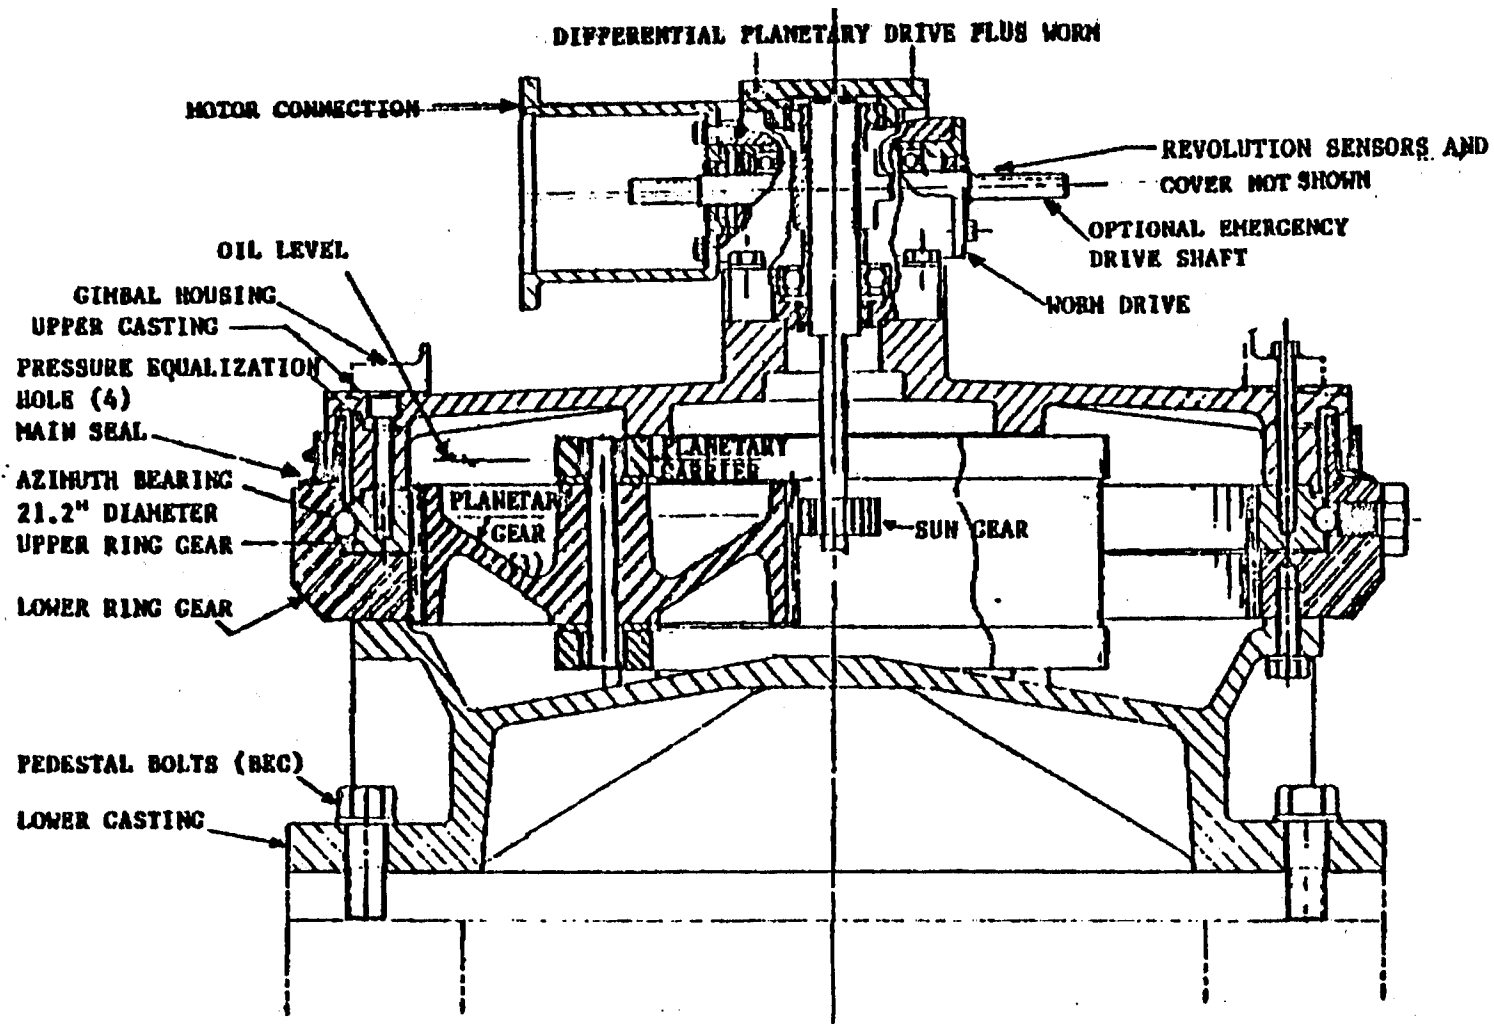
Cross-Section of Azimuth Drive/Bearing Assembly
